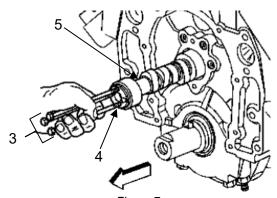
Install Camshaft (5) using three (3) 8-1.25 x 100mm Bolts (3) as a handle.
